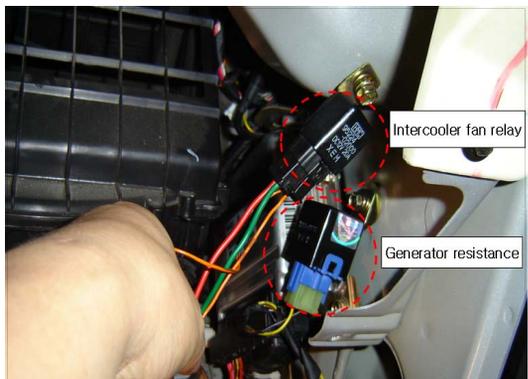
Assembling example of inter-cooler fan relay and generator resistor.
